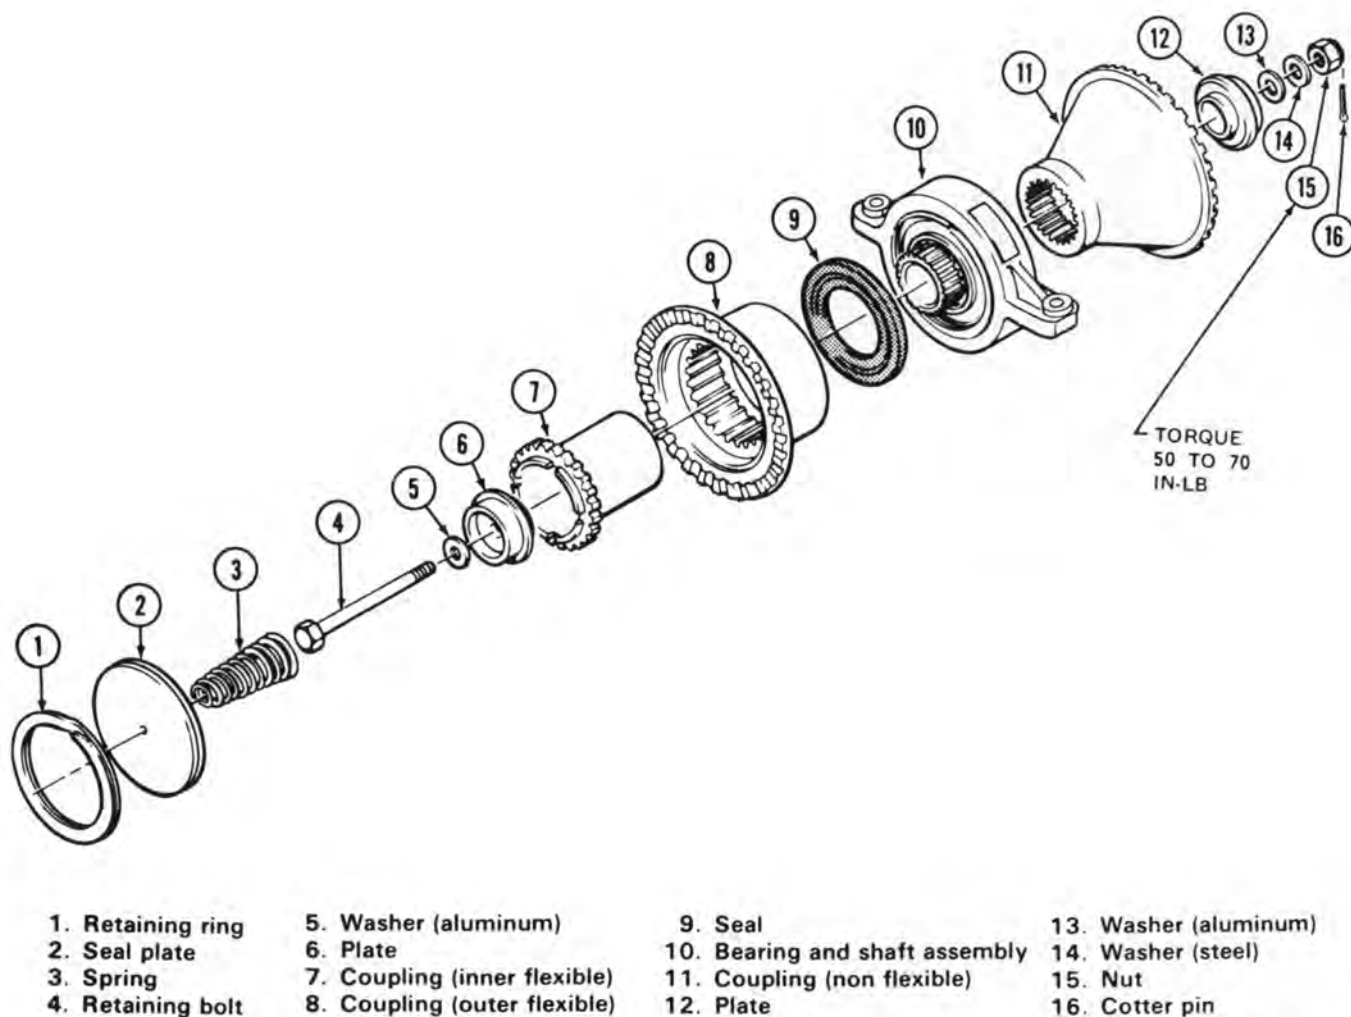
Tail Rotor Driveshaft Hanger Assembly
